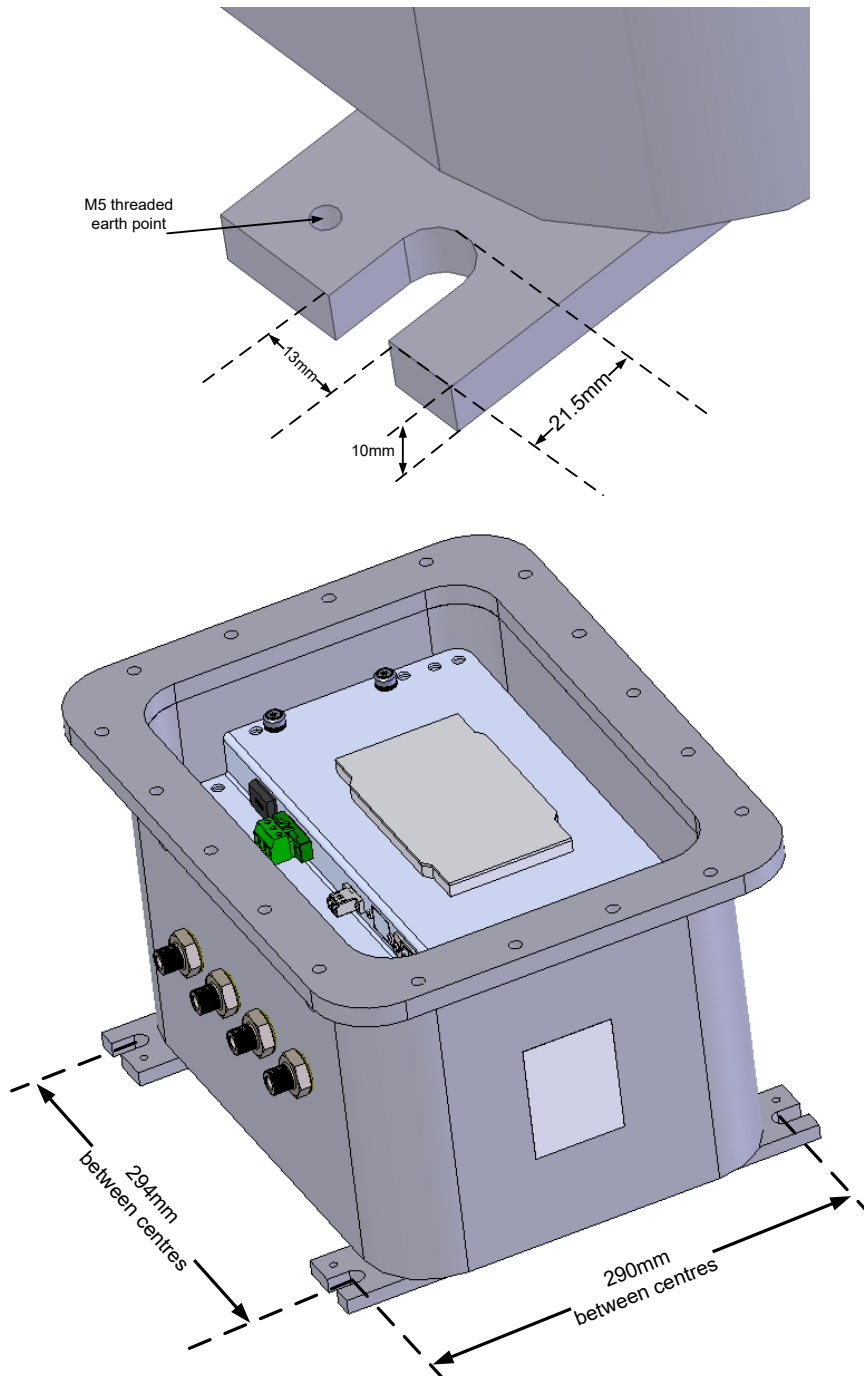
iWAP107/iRFID107 Stainless Steel Enclosure Mounting Points
